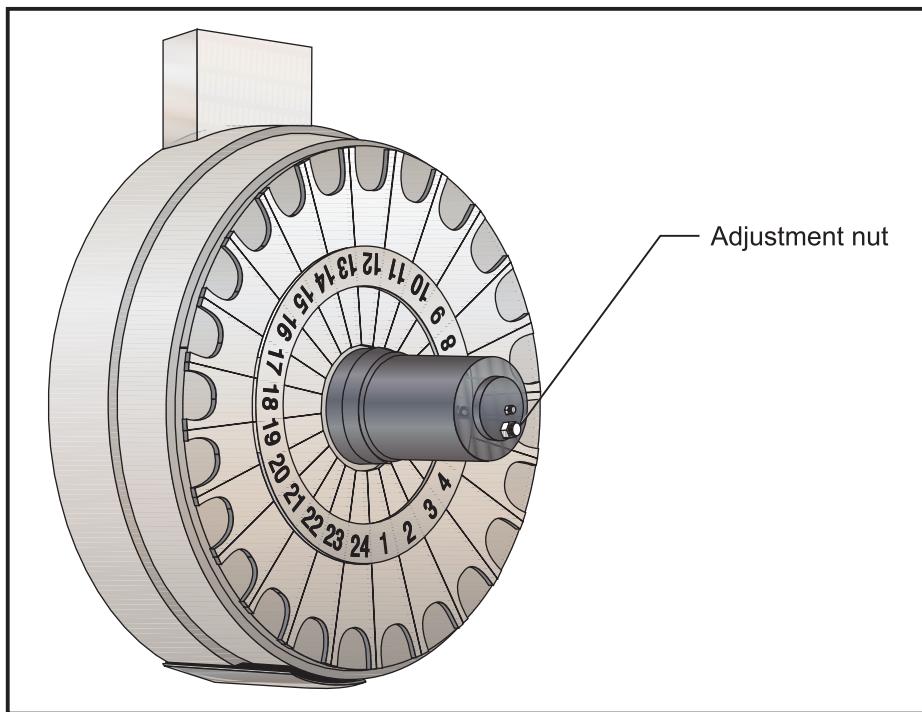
Tool Changer IN/OUT adjustment nut
